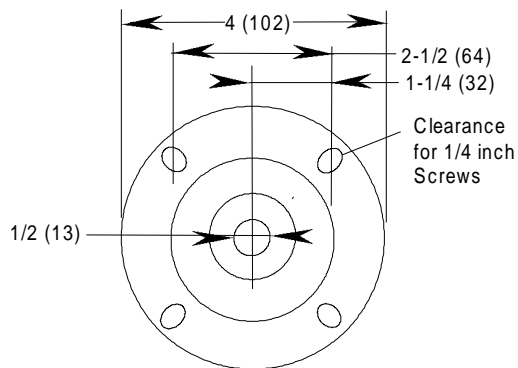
Auxiliary Mounting Bracket Dimensions, inches (mm)
